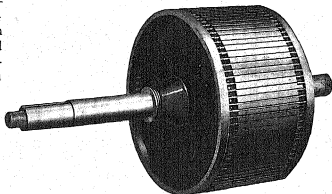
Squirrel-cage Rotor of Induction Motor
